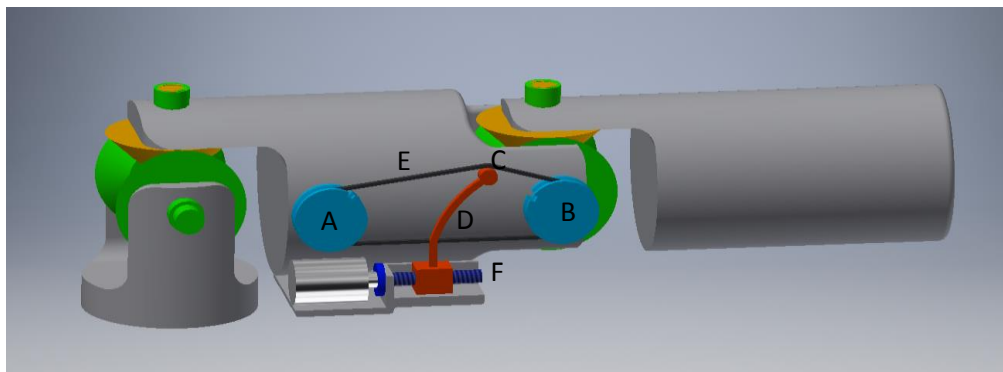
Representation of the variable stiffness mechanism mounted on a robot arm (driving a differential mechanism); A: driving joint (actuator), B: driven joint, C: freely rotating idler, D: beam spring, E: belt, F: lead screw.
